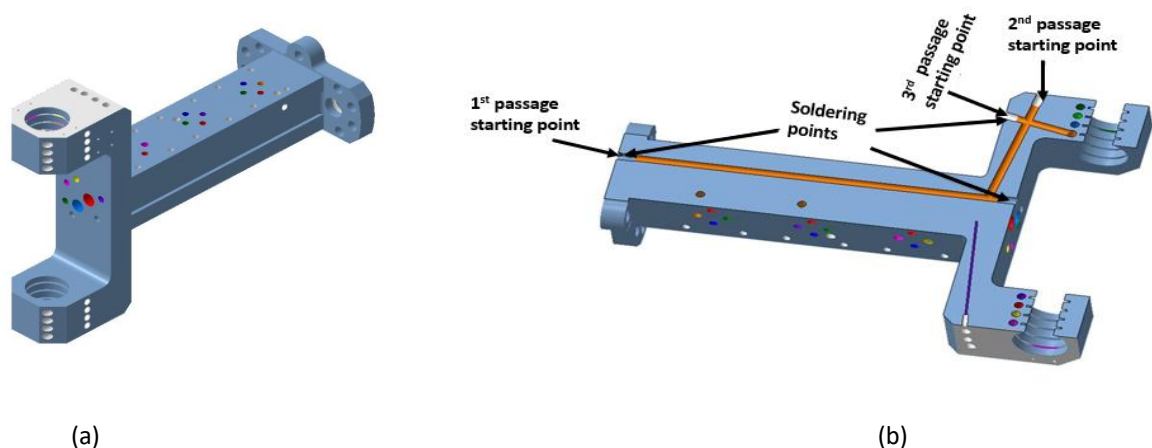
a) Elbow lower part (part No.5) of hydraulic integrated parts of the arm b) Illustration of the fabrication complexity of oil passages
